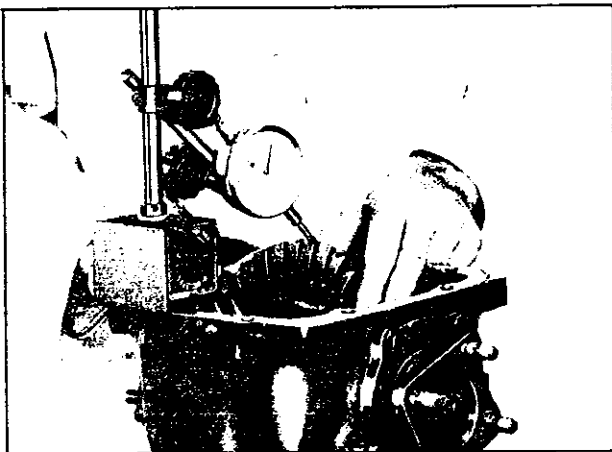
Measuring the backlash of the drive gear and pinion
